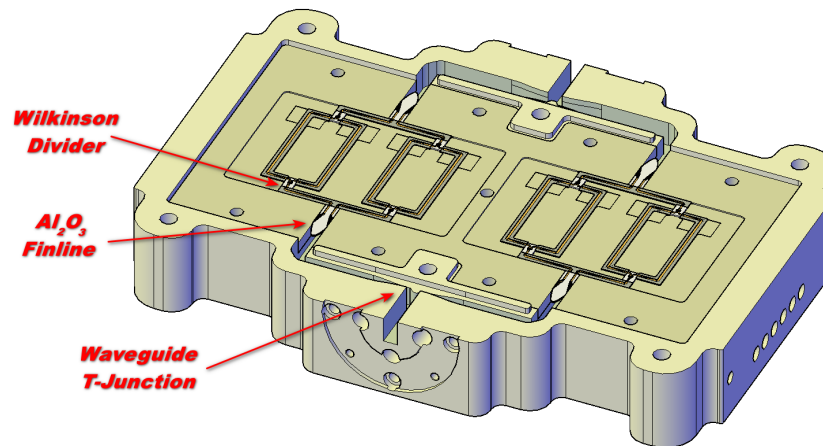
Passive Q-band SPC without top aluminium shell (View from mechanical drawing).
